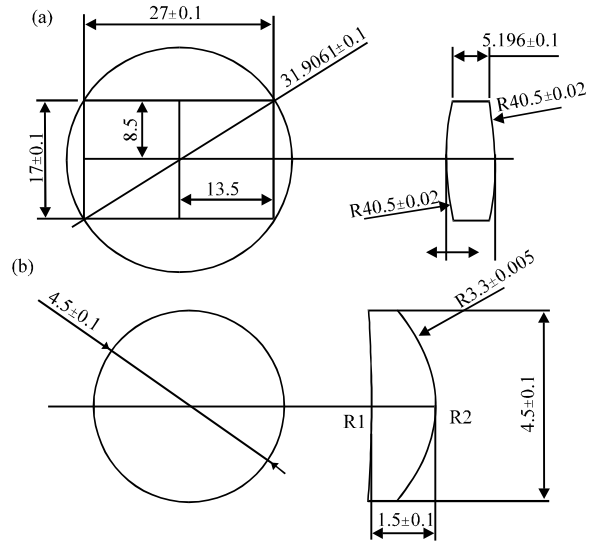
The drawing of G1, G2 lens design: a) The drawing of G1 lens design and b) The drawing of G2 lens design
